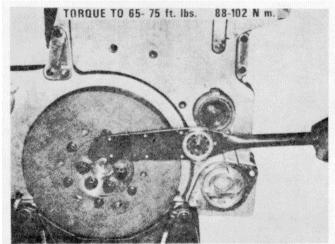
N-74. Tighten the Vibration Damper to Crankshaft
